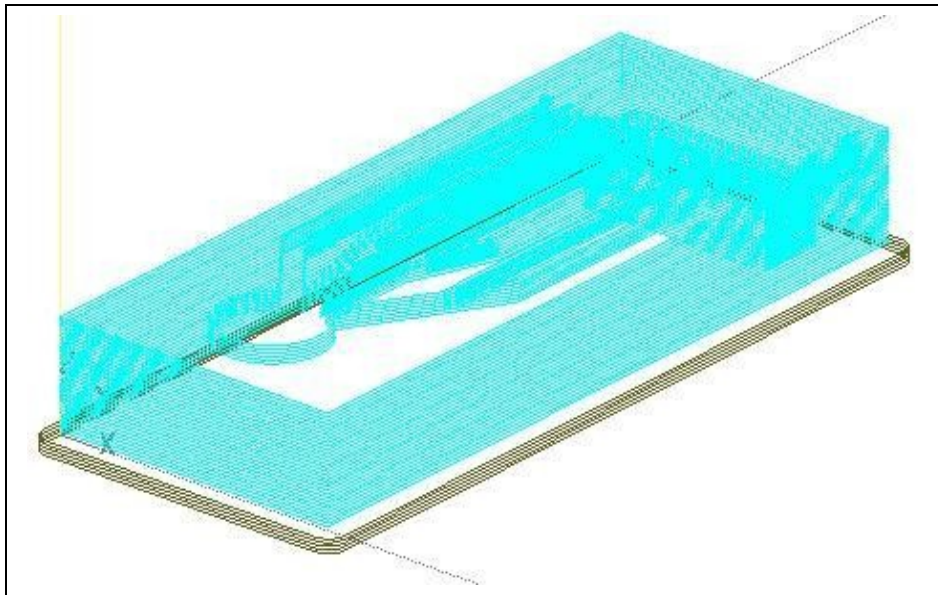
Analysis of test piece by Catalyst into tool-paths before sending to the RP machine.
